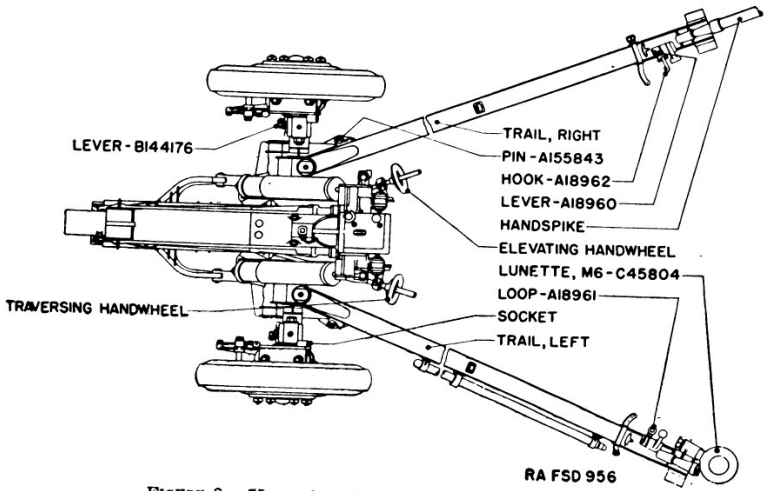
75-mm howitzer carriage, M3—plan view.
